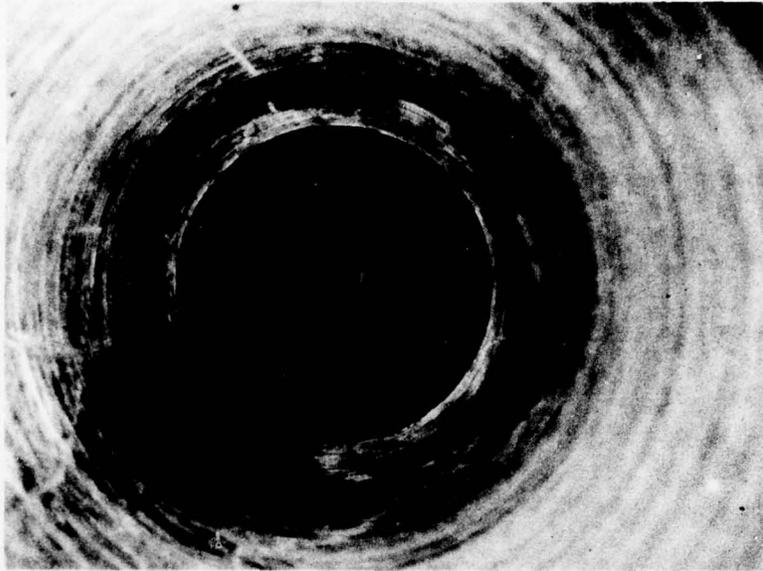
VIEW OF CATHODE COATING IN CONTACT WITH THE FOCUS ELECTRODE WITH CRACK IN A BULGED REGION ON THE RIGHT SIDE. MAG. 15X
